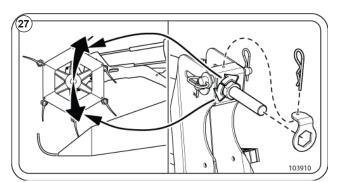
Centre reel arm height adjustment instructions - 103910
